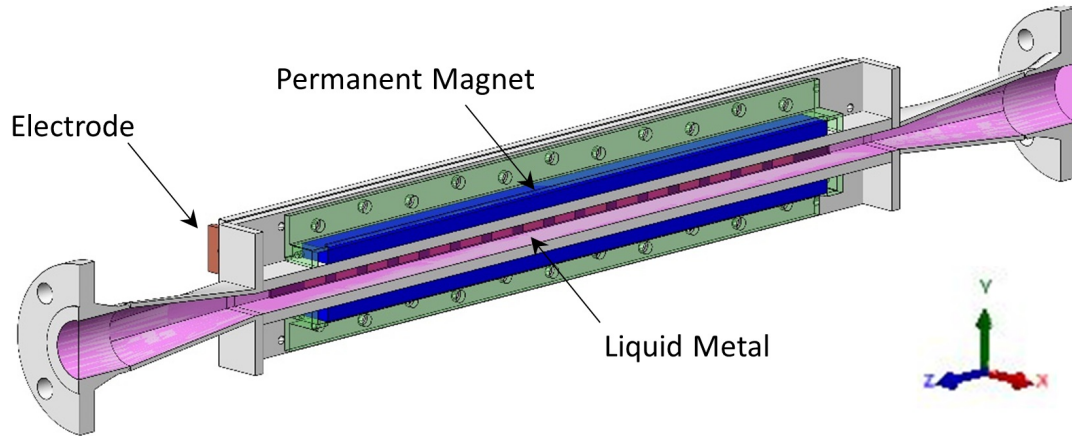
MHD generator 3D view with cut-out section along the y-z plane
